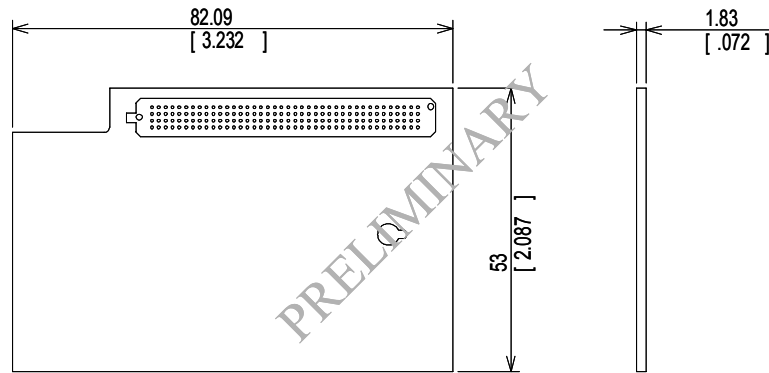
CIOv I/O Expansion Card (CIOv) – bottom and side view – card size, connector locations
